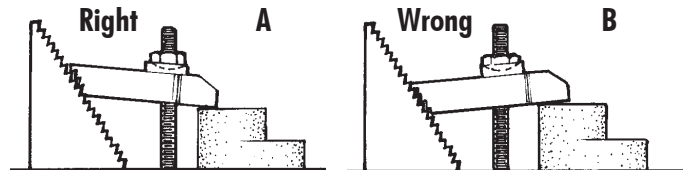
(A) Shows the correct way to hold a part. The tip of the clamp should grip the part. (B) Shows the wrong way, with the clamp angling upward and pushing down on the edge of the part. (NOTE: The angles are exaggerated for illustration purposes. Keep the clamps as close to level as possible in actual use.)
